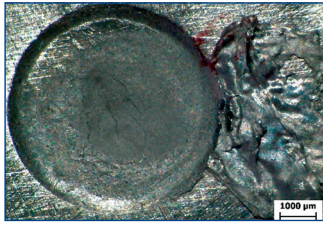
Spot weld upper view, spatter, cracks present 1 kN, 8 kA, $t=100$ ms, cooling 2.5 s
